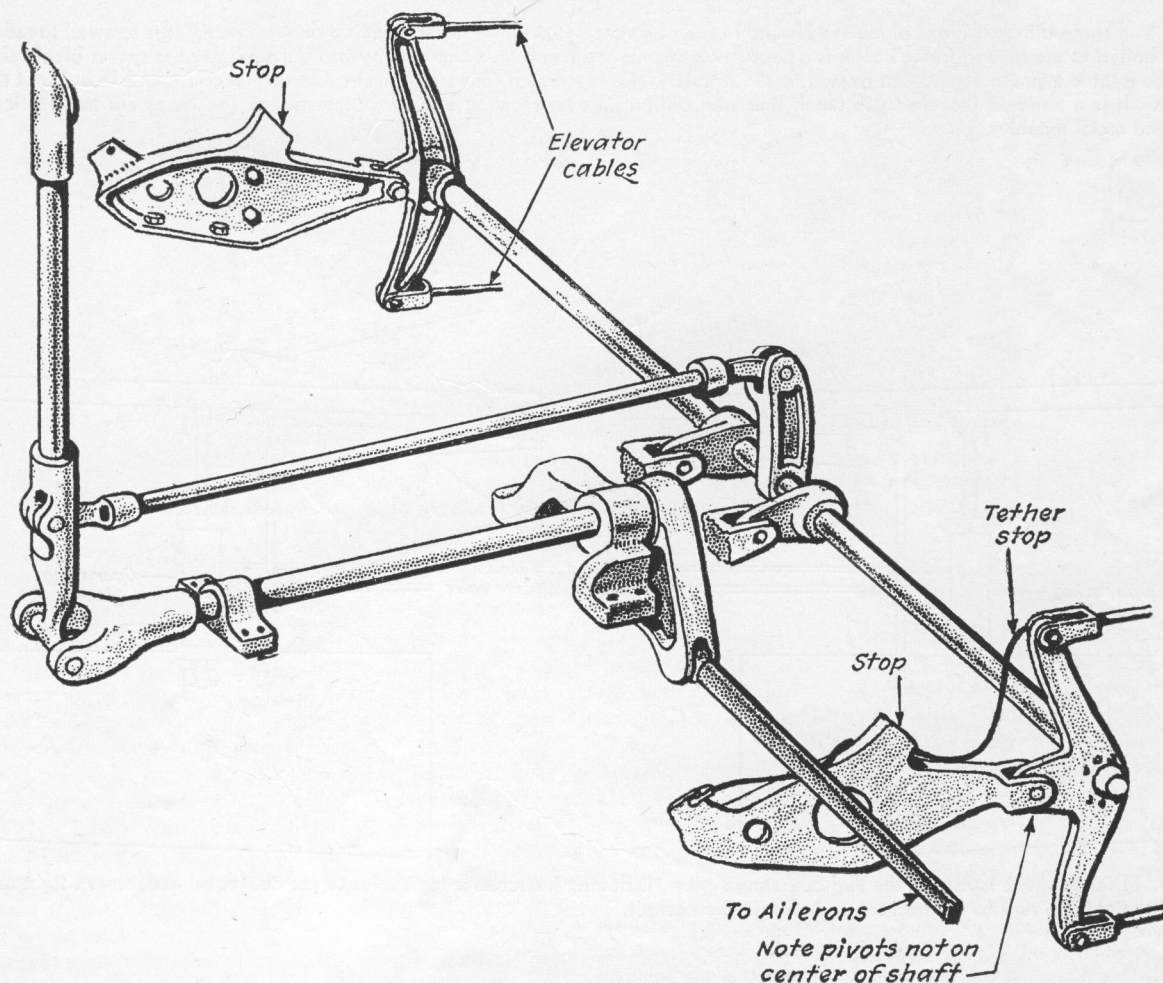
Elevator and aileron controls in the cockpit. Push-pull rods extend out through idlers to the ailerons; cables extend from elevator bell cranks. Note the stop block and cable on the elevator bracket which is attached to rear spar and former G.
